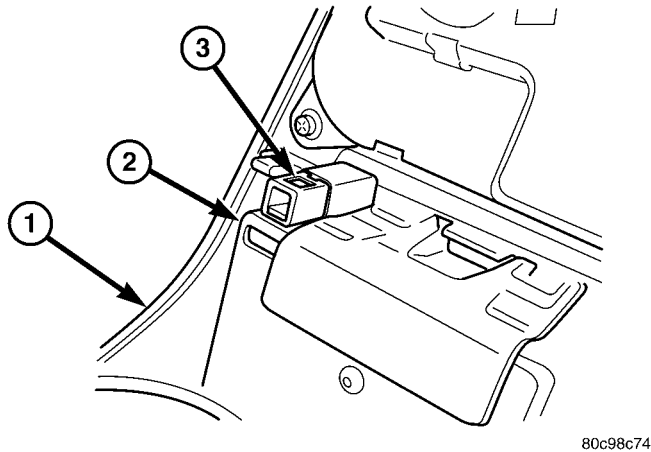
Ash Receiver Lamp Unit Remove/Install
